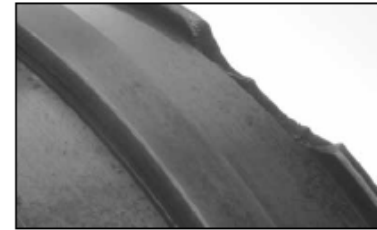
This spherical roller bearing inner race depicts a fractured small rib caused by the use of improper installation tools.
